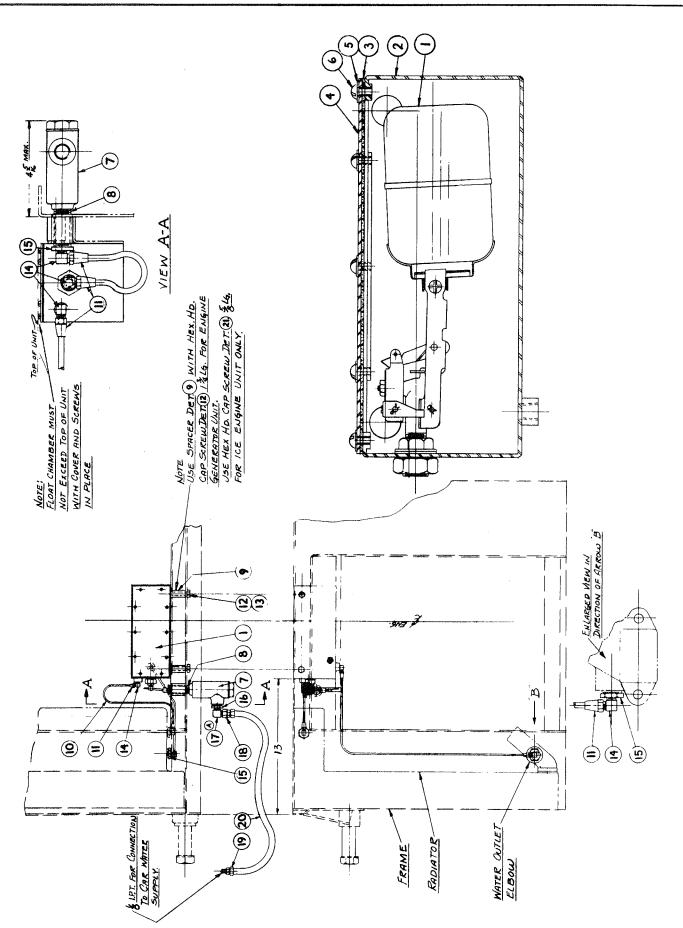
AUTOMATIC RADIATOR WATER FILLER ASSEMBLY
